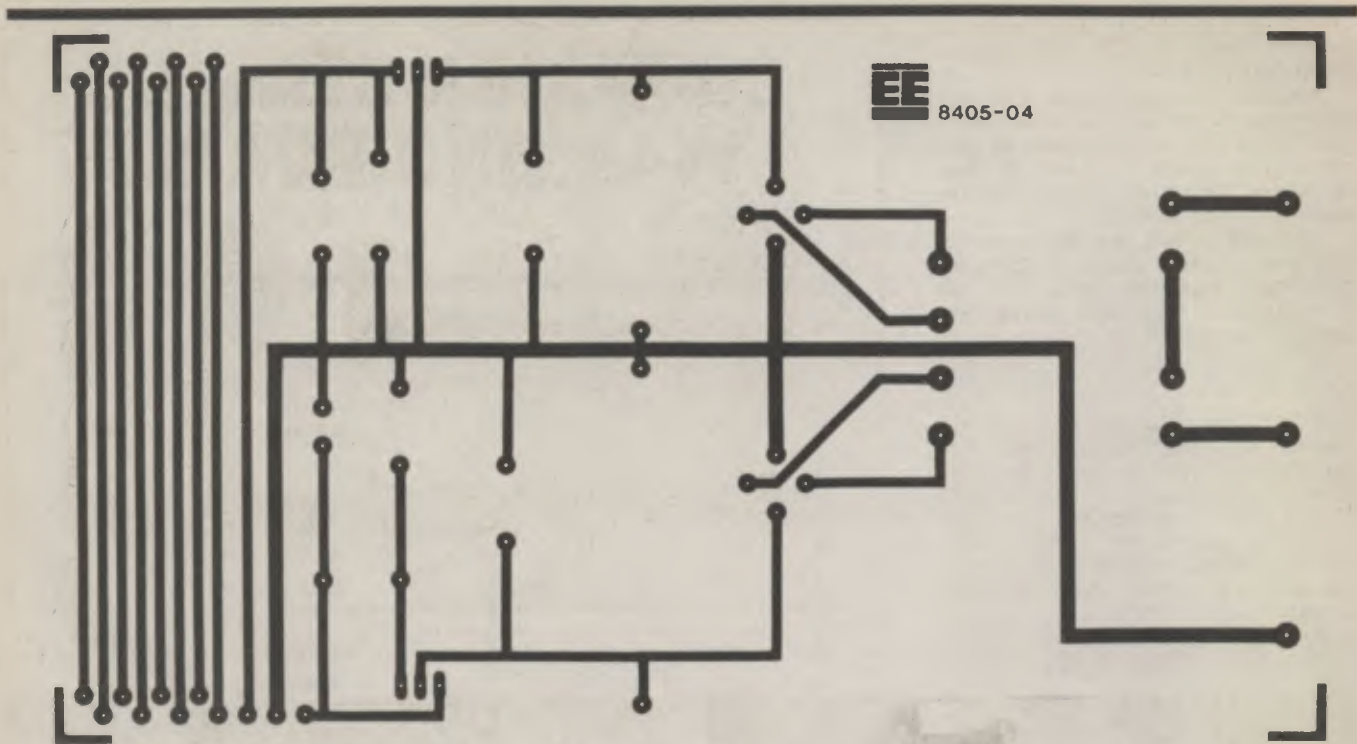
Actual-size master pattern for the power supply board. This board is available from the *EE PCB Service*, Order code 8405-04.
